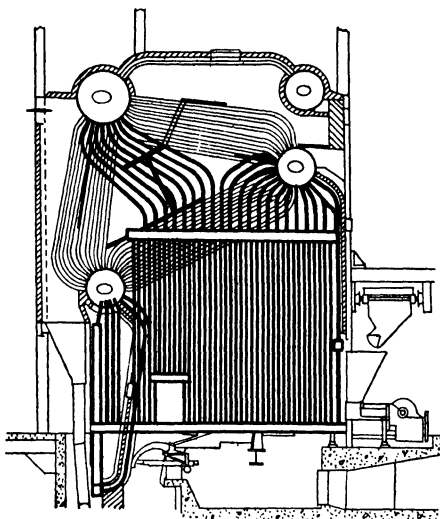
Water-cooled furnace with waterwall headers carried in wall and down-comer tubes projecting into mud drum.
